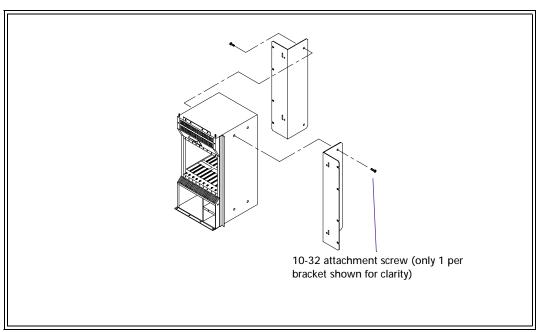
Attaching the rack mount plates to the WAVEXpress/BTS chassis
